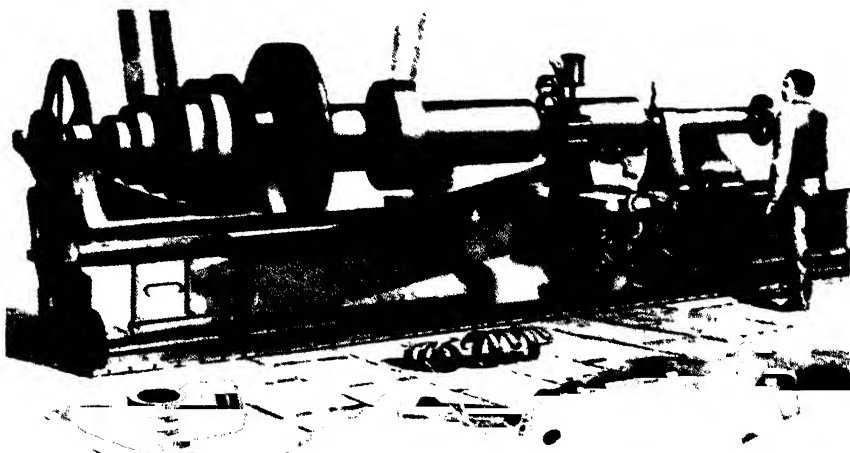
Lathe in Use for Metal Turning in 1880. Tools of Mushet Steel Doubled the Output of Such Machines
